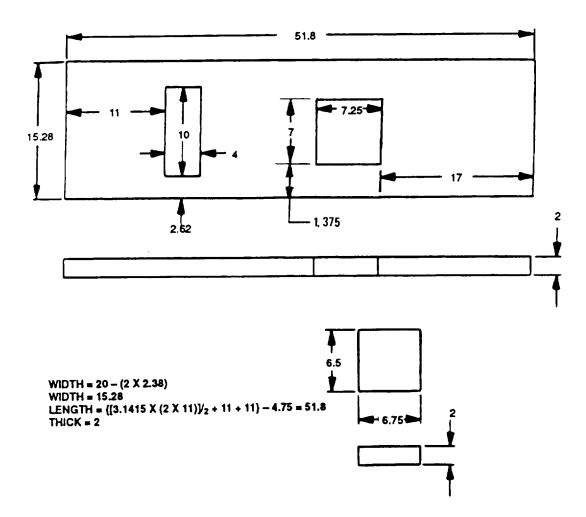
Acoustical Foam, Sound Enclosure, Cover Assembly
